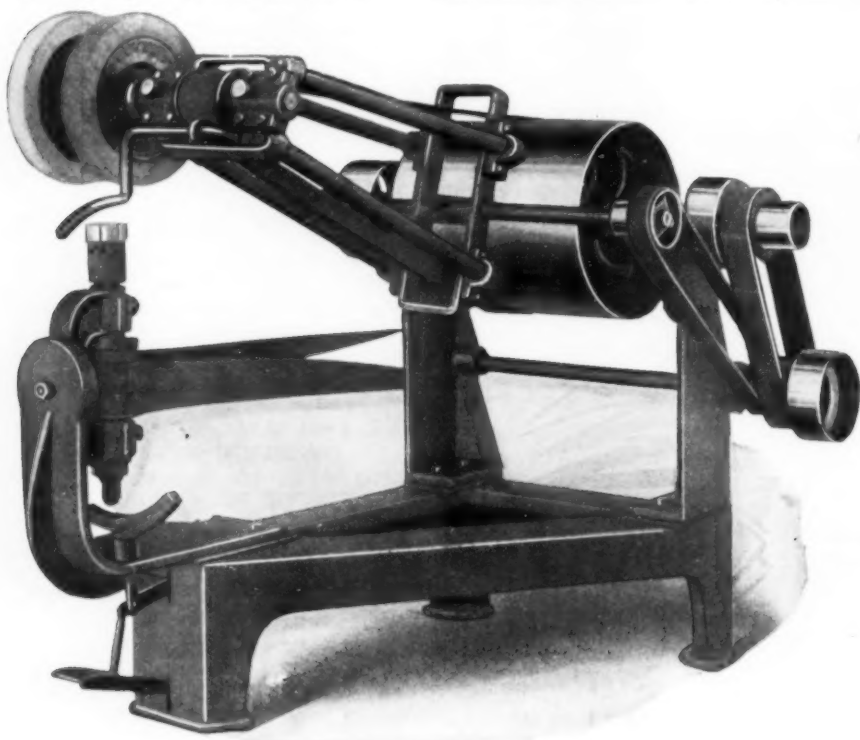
THE VERTICAL HEAD AUTOMATIC POLISHING AND BUFFING MACHINE.
